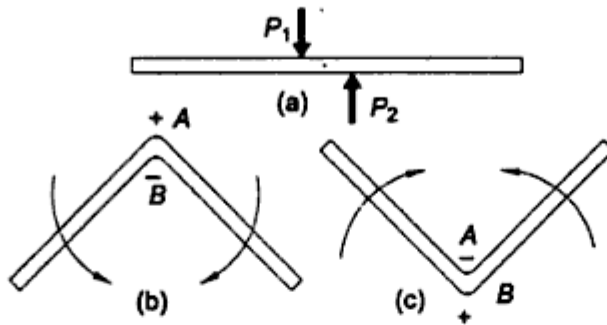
Shear and Fatigue Failure of Wire (a) Shearing of Wire (b) Bending of Wire (c) Unbending of Wire
